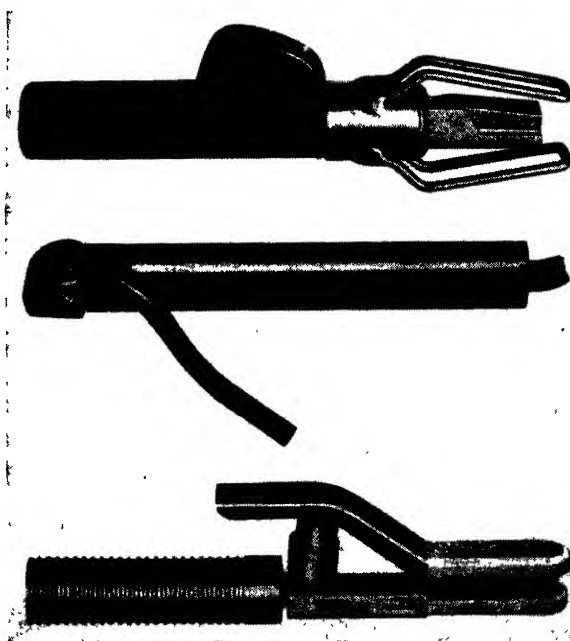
Types of insulated electrode holders. Such holders are usually preferred for farm welding. (James F. Lincoln Arc Welding Foundation)
